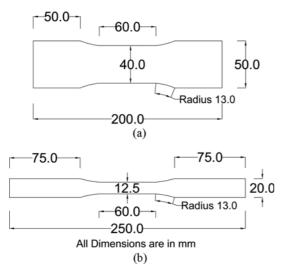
Dimensional Details of Coupon Specimen Extracted: (a) Angle, (b) Tubes
